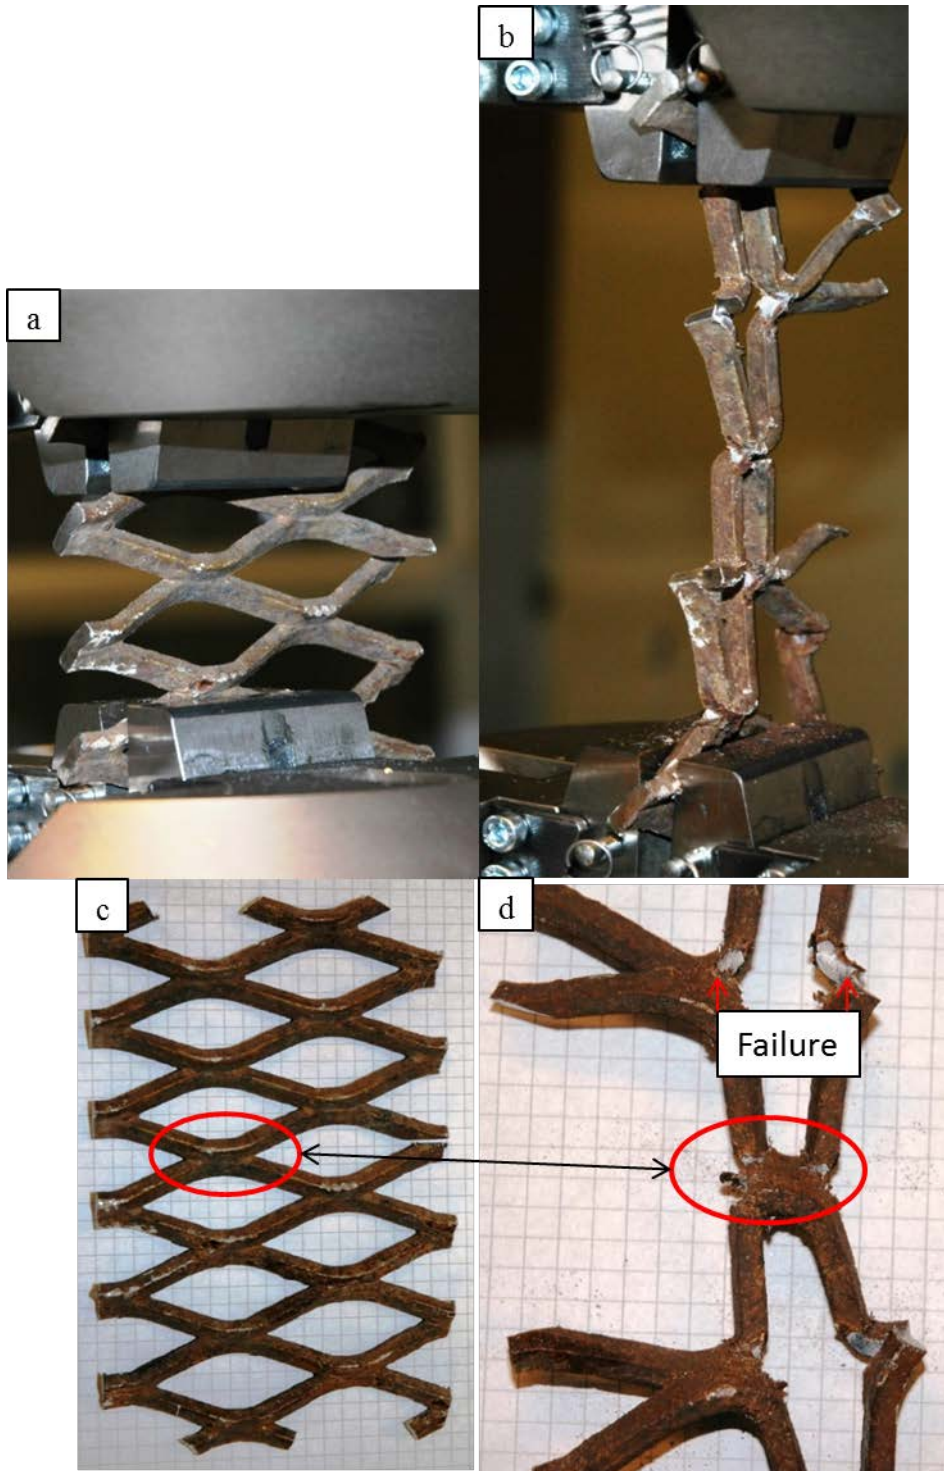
Image of wire mesh specimen mounted in tensile testing machine. b: Image of wire mesh specimen mounted in tensile testing machine after testing. c: Overview image of wire mesh sample identifying the single weld tested. d: Image of wire mesh sample after testing with identification of the location for final fracture.
